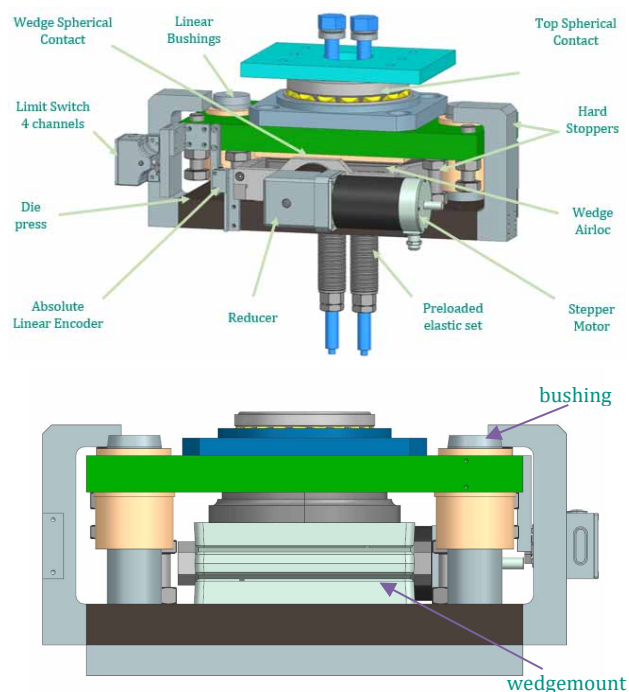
Positioning system detail. Top details of all the parts, bottom the wedge mount guided by the linear bushings is appreciated.
